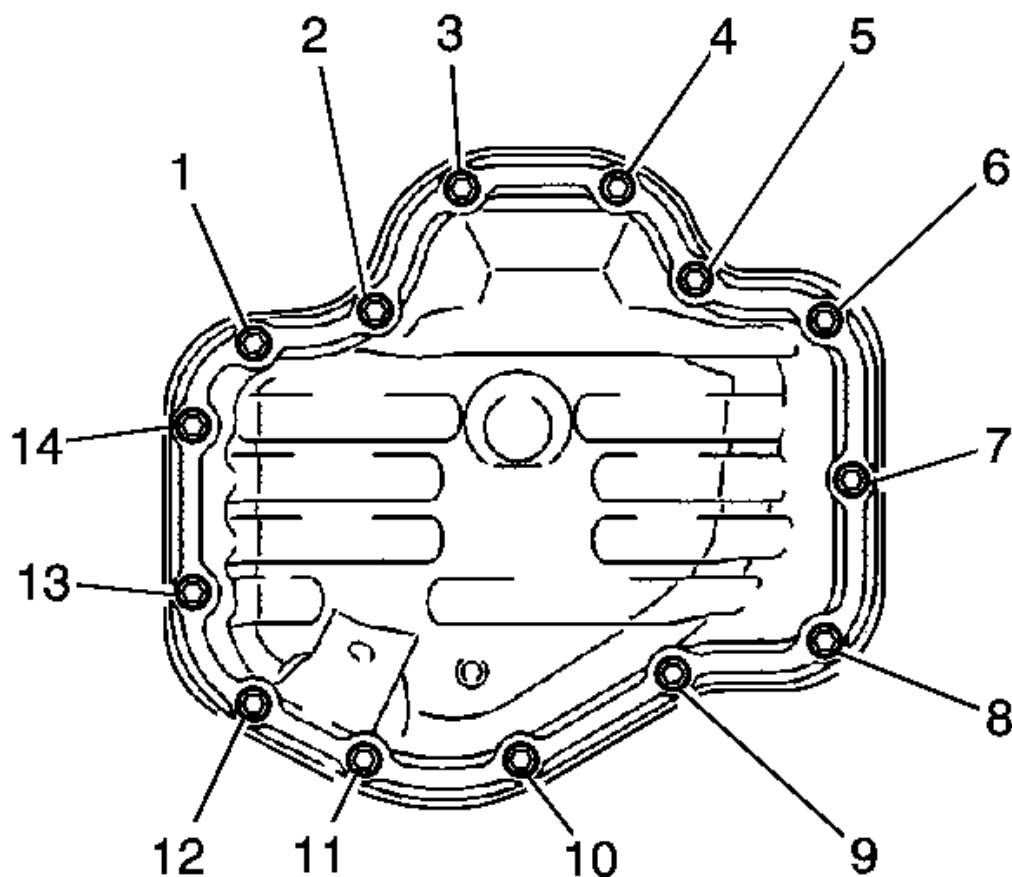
Identifying oil pan sub-assembly Bolt Loosening Sequence
